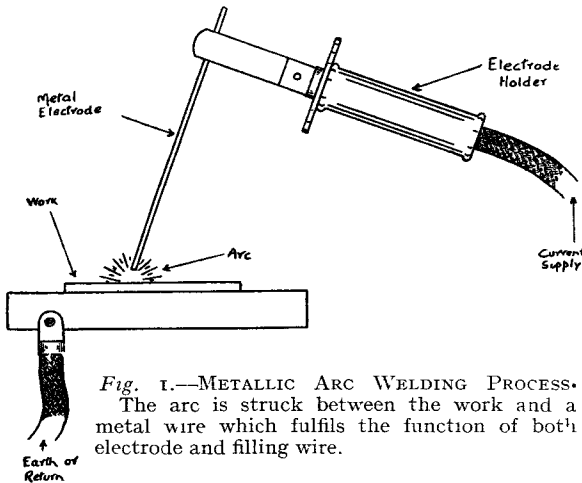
METALLIC ARC WELDING PROCESS.
